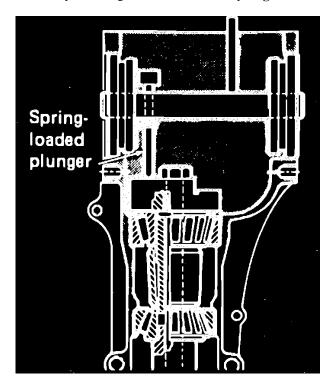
Installing Arbor Assembly With Discs Into Differential Carrier
